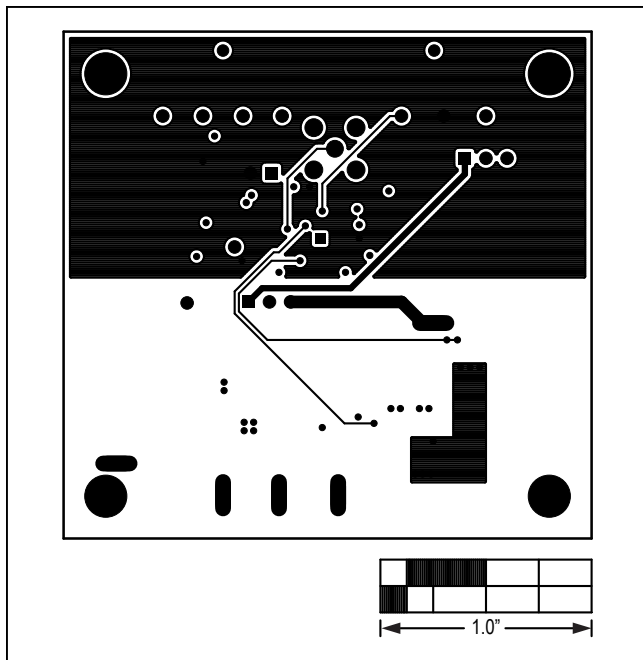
MAX16990 EV Kit PCB Layout—PVL Layer 3
